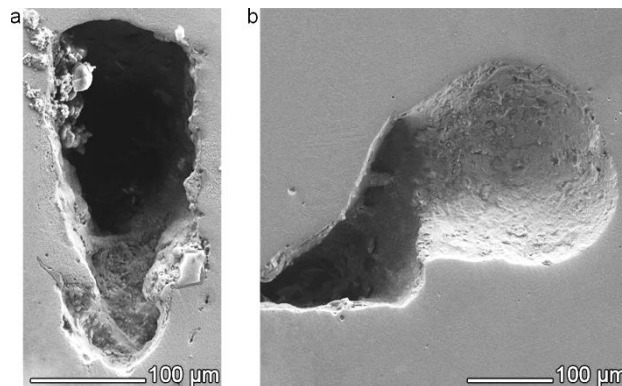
SEM of weld imperfections, visible in Fig.5b-c (a) Crack between 2nd and 3rd pass; (b) Pore in lower left corner of bottom pass.
